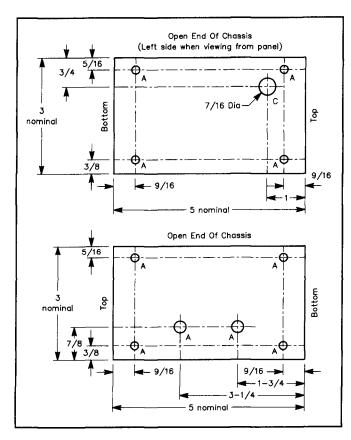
RF deck. At top, tube end; at bottom, flapper end. Holes marked A are chassis mounting holes, No. 23.
